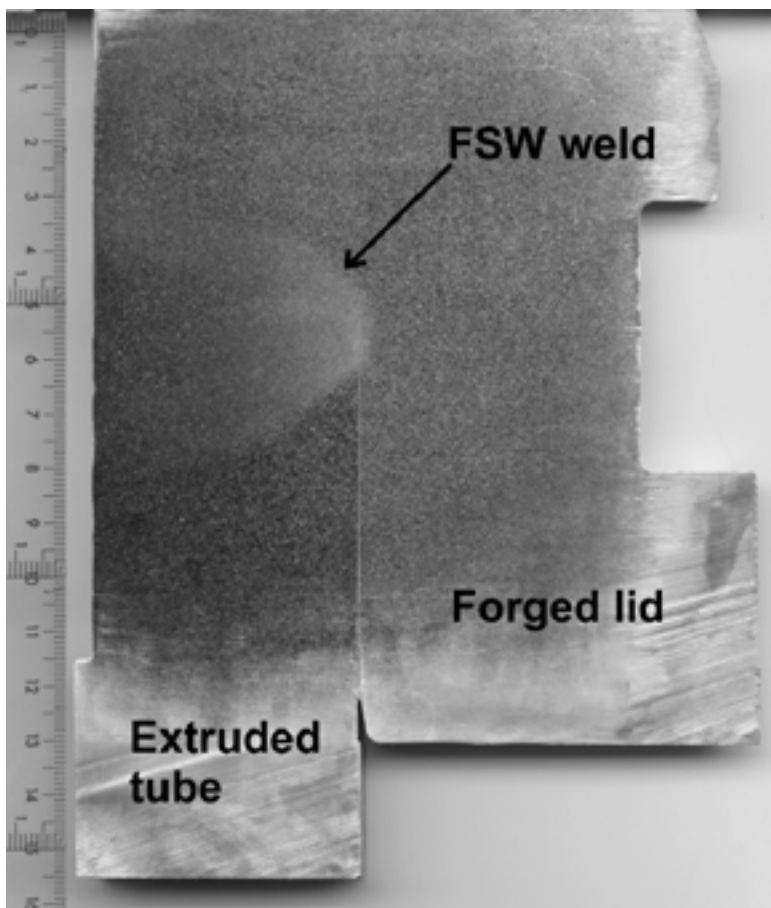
Cross section of the friction stir weld. At the bottom a section of the extruded shell is seen and to the right the forged lid. The protruding lip at the top right corner is a circular lifting tab for handling of the manufactured canisters.
